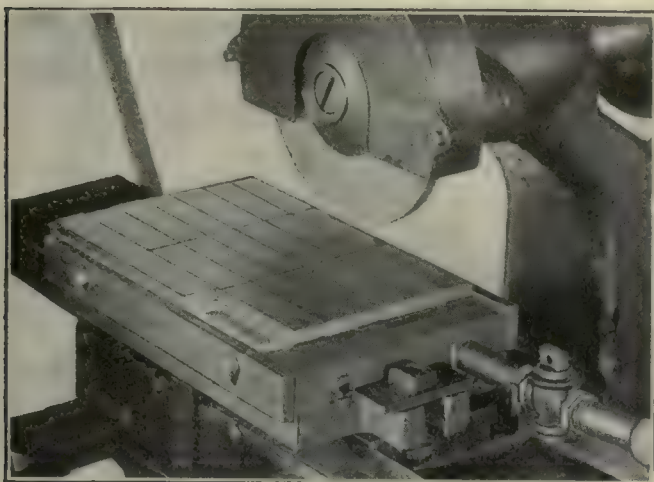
CHUCK LOADED WITH PIECES FOR GRINDING
